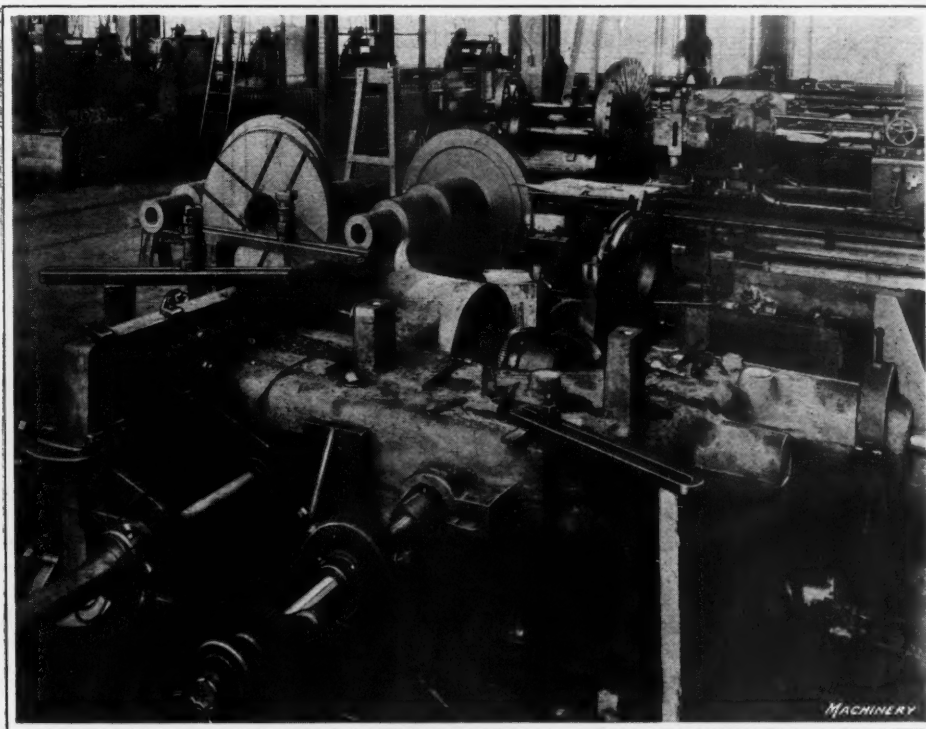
View showing the Casting in Readiness to be machined, and the Three Boring-bars used
